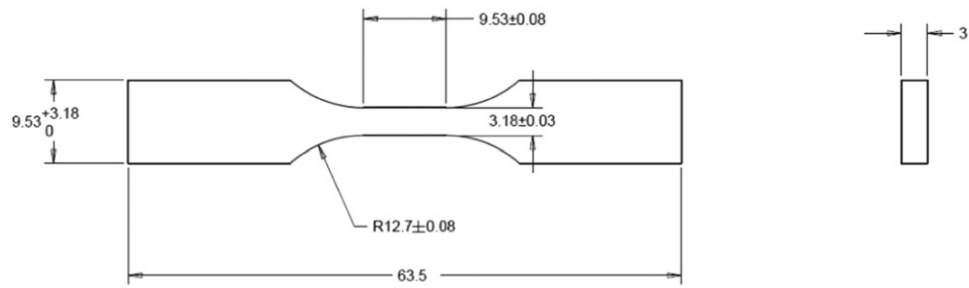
ASTM D638 Type V specimen (All dimensions in mm).
